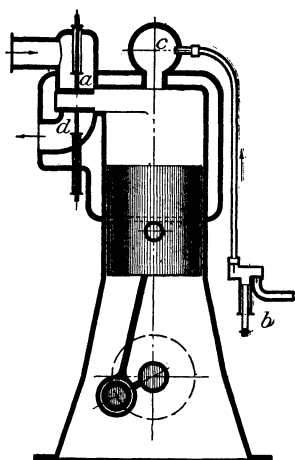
Explosion oil engine, four-stroke cycle.
